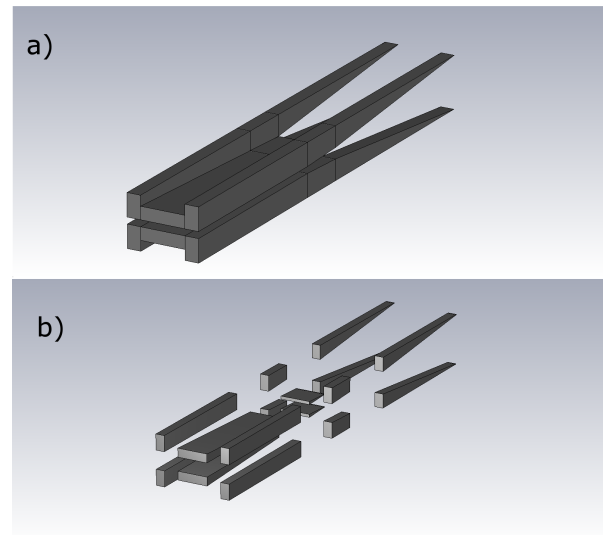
a) View of two identical halves of the dielectric load; b) exploded view of individual tiles of the load.
